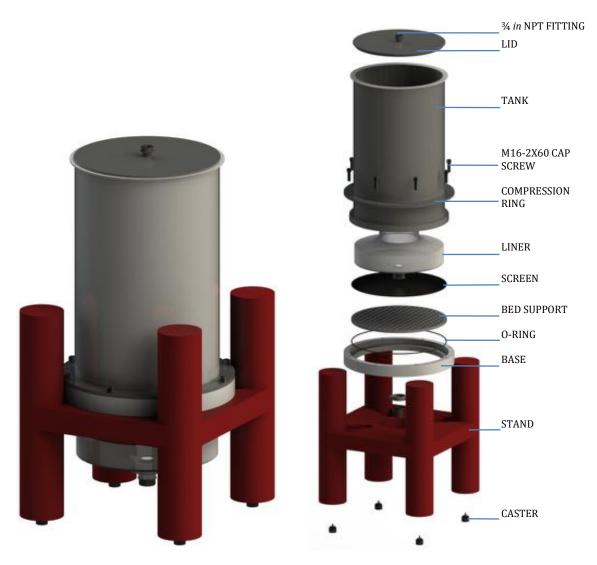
Assembly view of the final design and exploded view showing the components of the column. The design has an overall height of 1234 *mm* (approximately 49 *in*.) and a width of 643 *mm* (approximately 25 *in*.). The main feature of the single-use design is the liner. The liner is used in order to allow the outer structure to be reusable. The inlet is designed in order to create a seal and allow resin and plasma to be added to the
